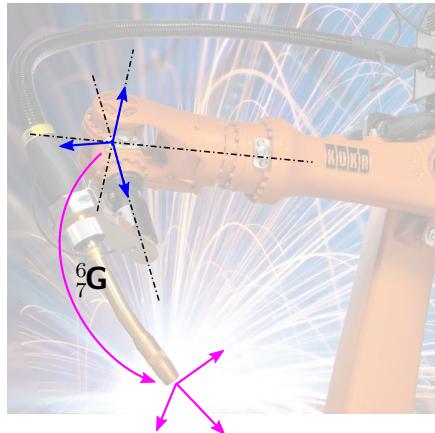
Welding tool attached to the robot arm (background image from www.kuka.de)
